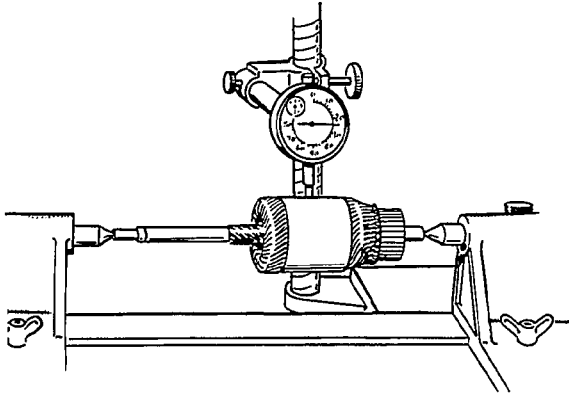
CHECKING ARMATURE SHAFT RUNOUT
